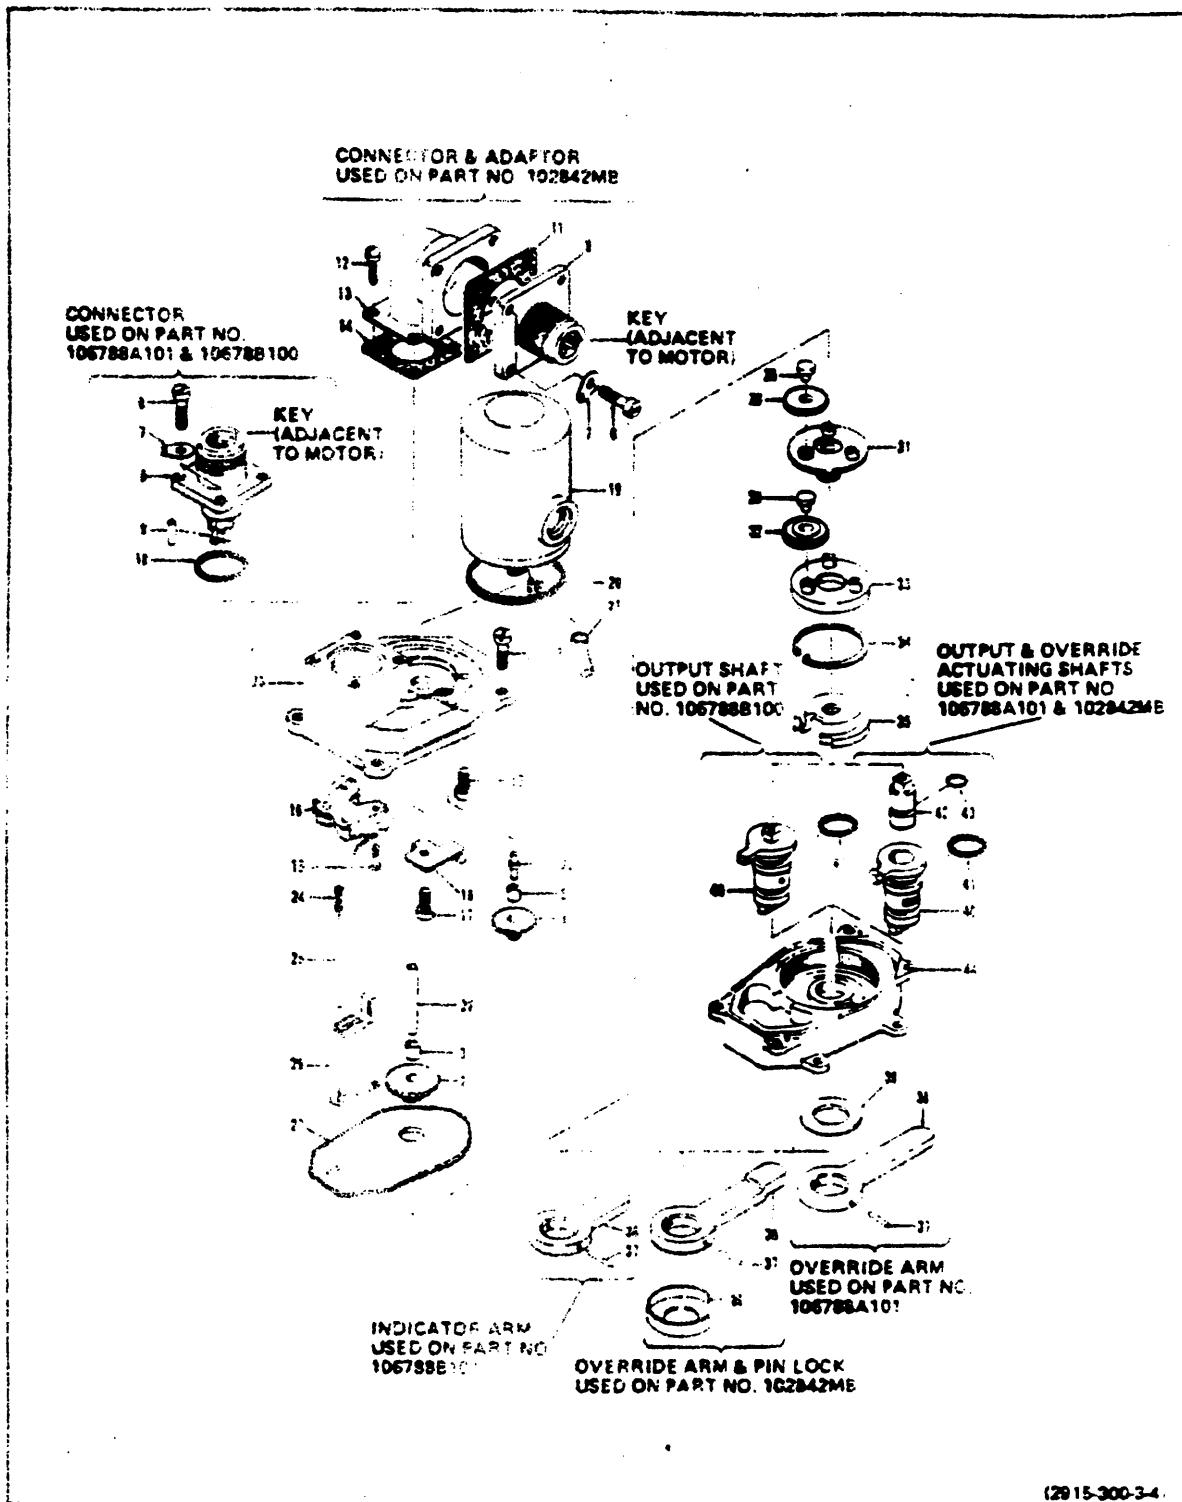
Actuator Assembly, Part A - 106788A101, 106788B100, and 102842MB - Exploded View
